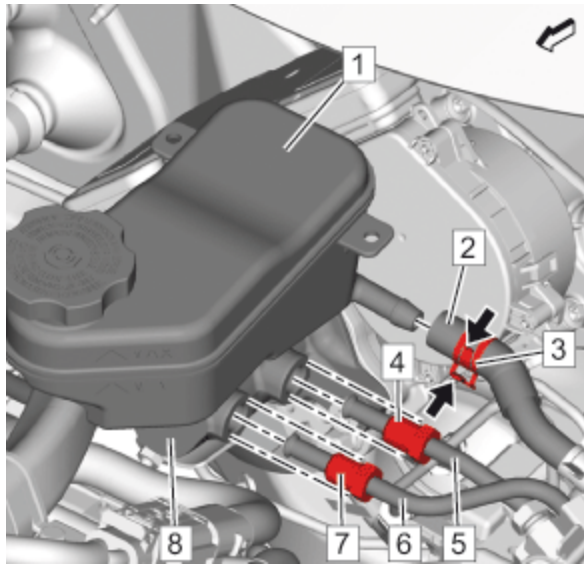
Brake Master Cylinder Reservoir Hose And Brake Pressure Modulator Valve Secondary Pipe
